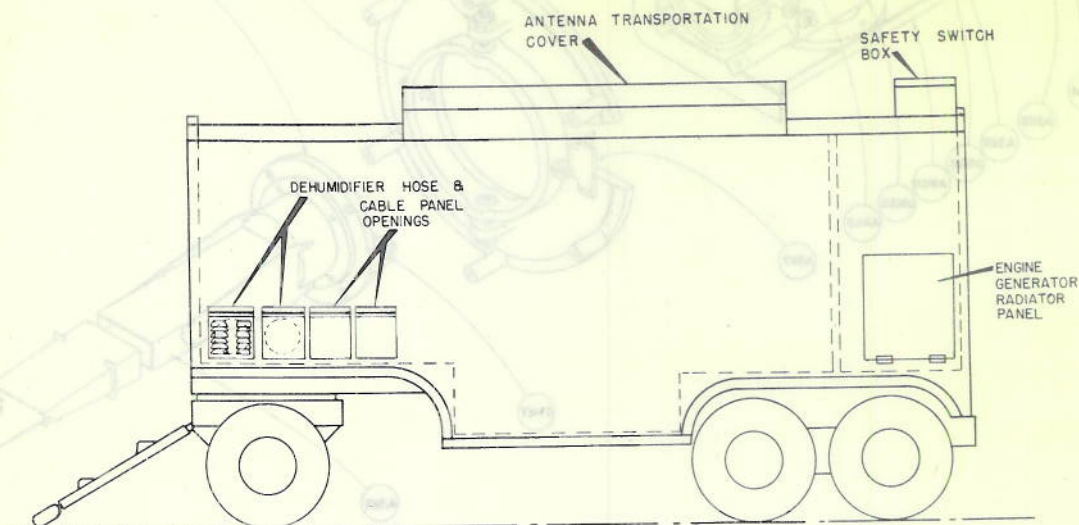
Equipment Trailer - Road Side Exterior View - Line Drawing
